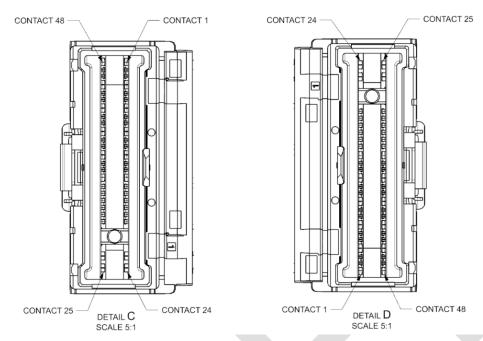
Cable Assembly Free-Side Connector Contact Numbering
